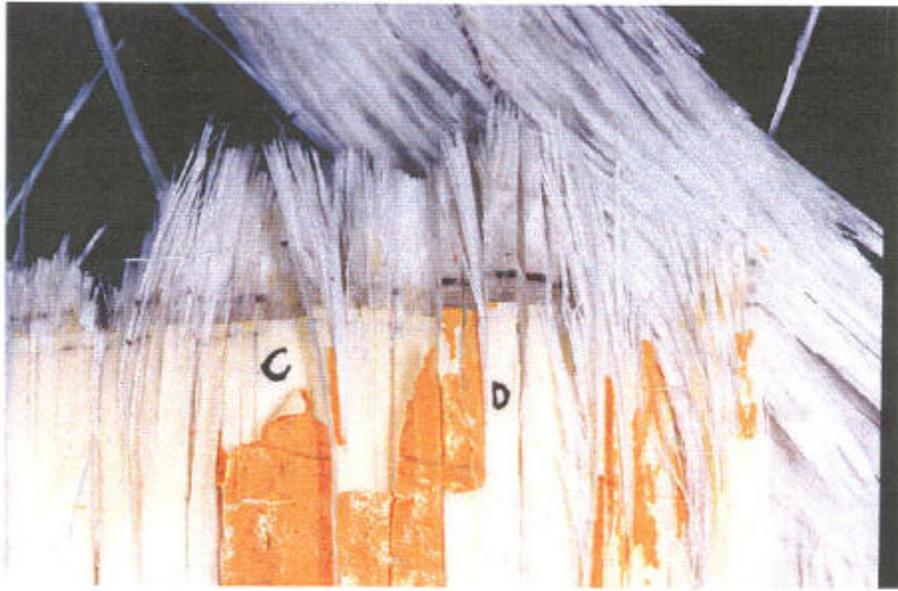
Appearance of Failed Circumferential Fibers at Initial Failure Site
